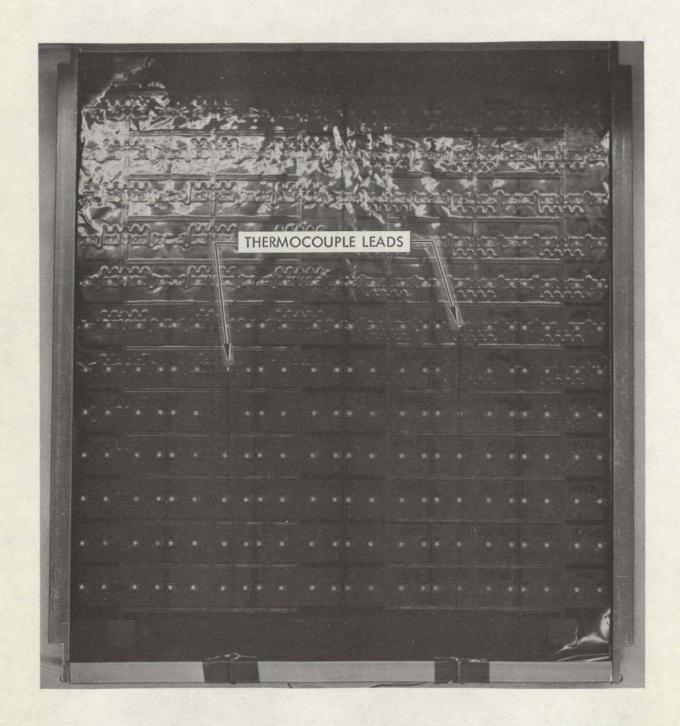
72-Cell Module No. 6, Thermocompression Bonded, Gold-Plated Copper Interconnect, Back Side
